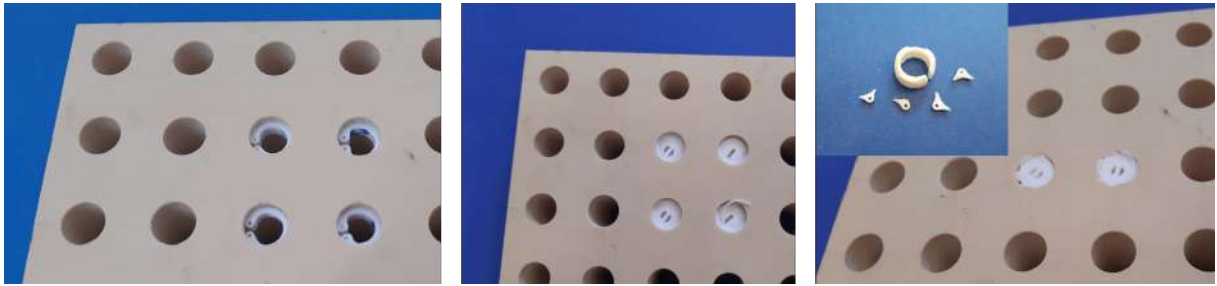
Specimens after symmetric push-in test performed on polymeric burr hole rings and corresponding polymeric burr hole cups.
